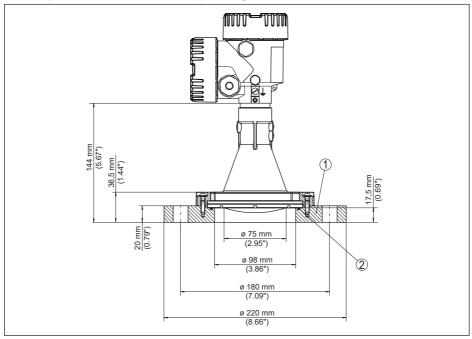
NCR-86 with adapter flange DN 100 PN 6
